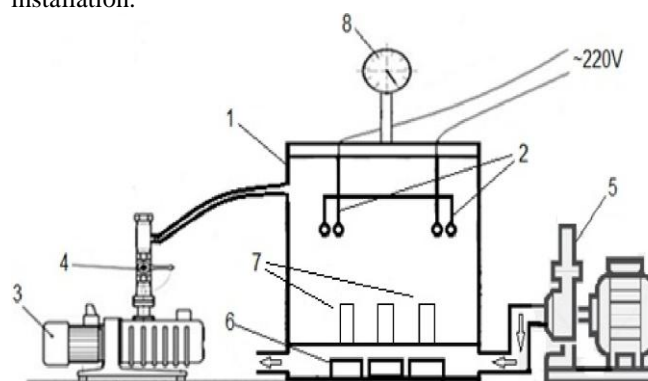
Technological installation for sintering metal powder materials: 1 - vacuum chamber; 2 - thermal emitters 4 pcs; 3 - vacuum pump; 4 - vacuum valve; 5 - water pump; 6 - neodymium magnets; 7 - sintered parts; 8 - vacuum gauge.
